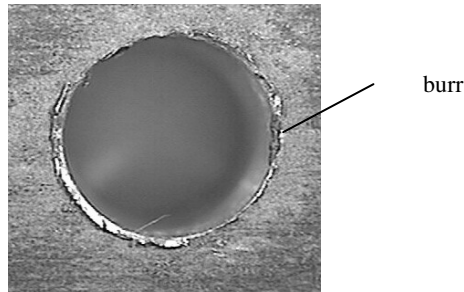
Burr formed around a drilled hole (microscopic photograph)
